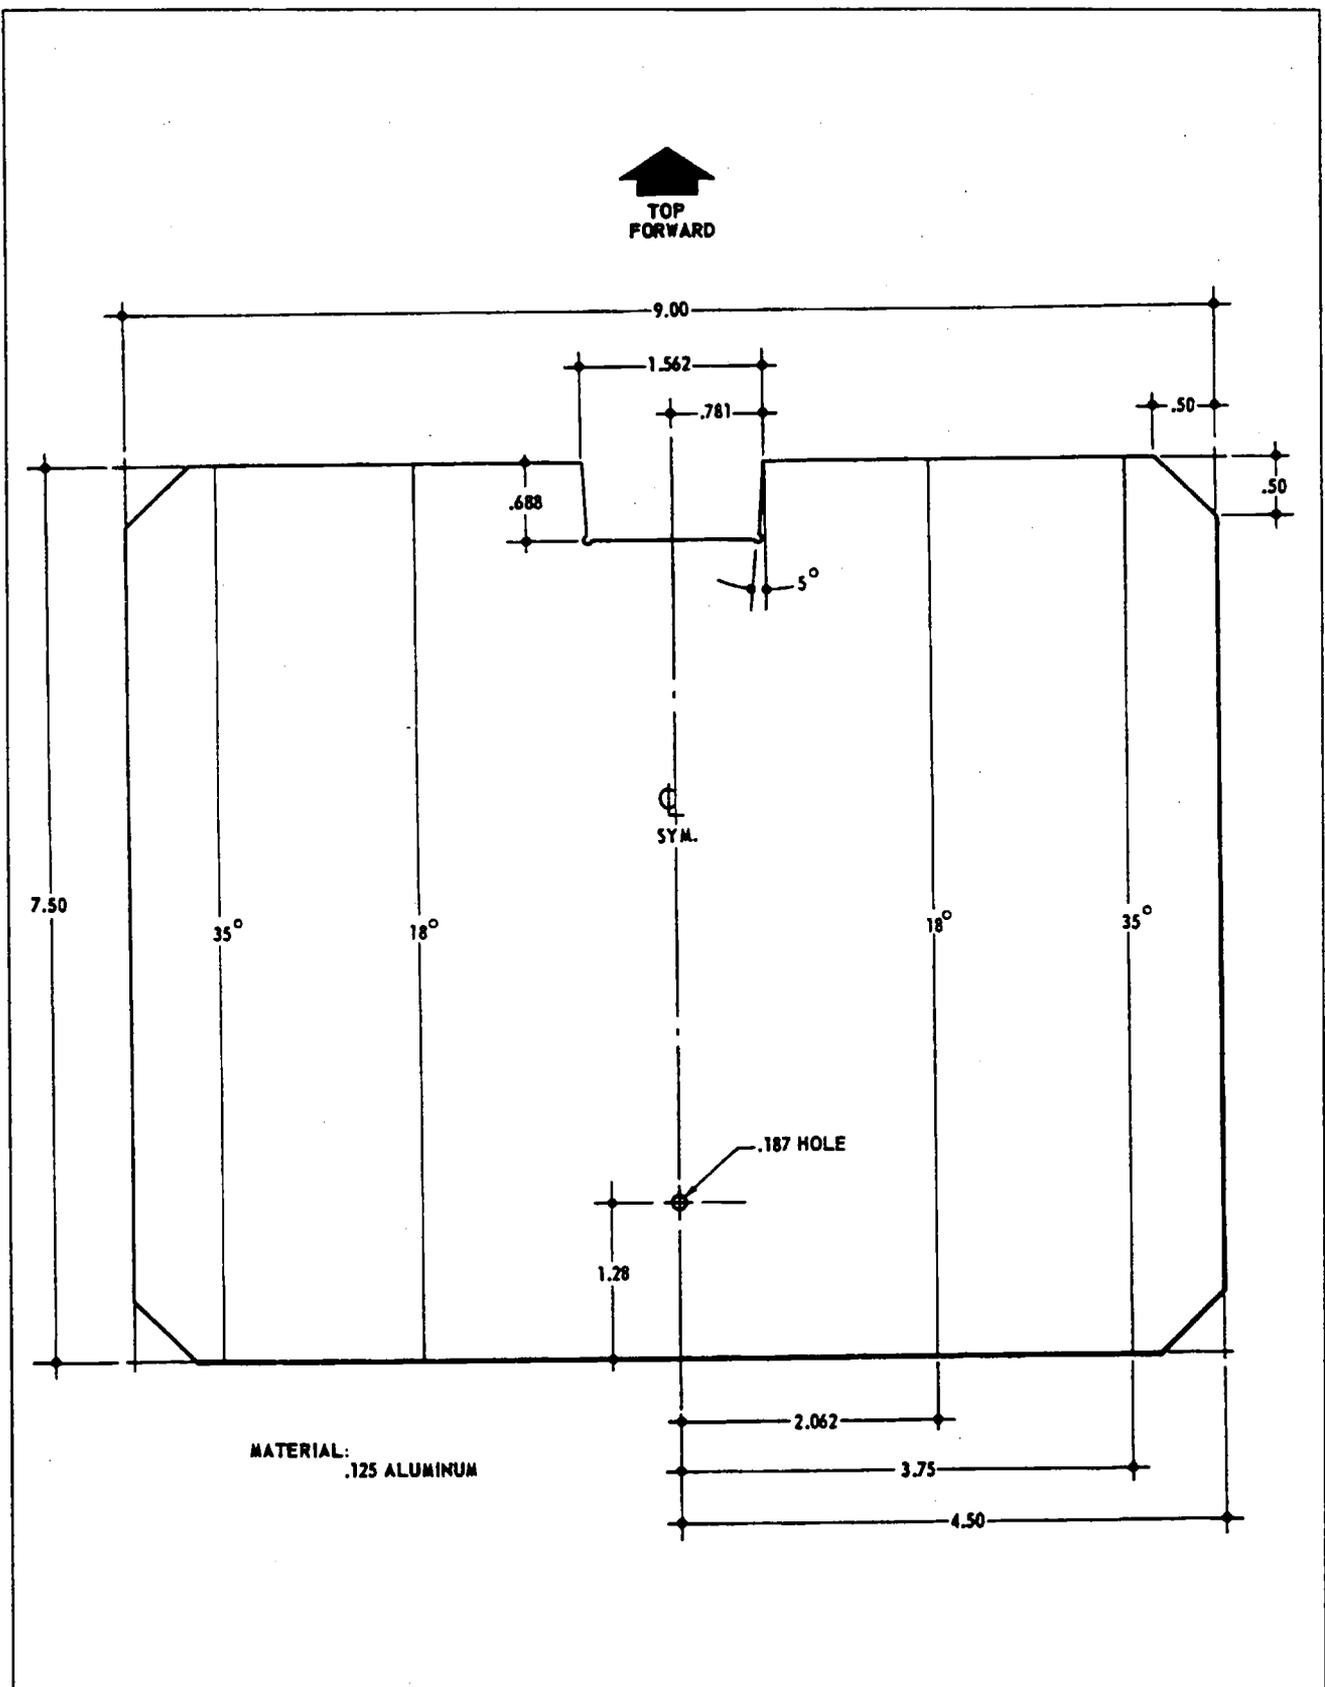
Fabricated Rudder Trim Tab Rigging Tool
